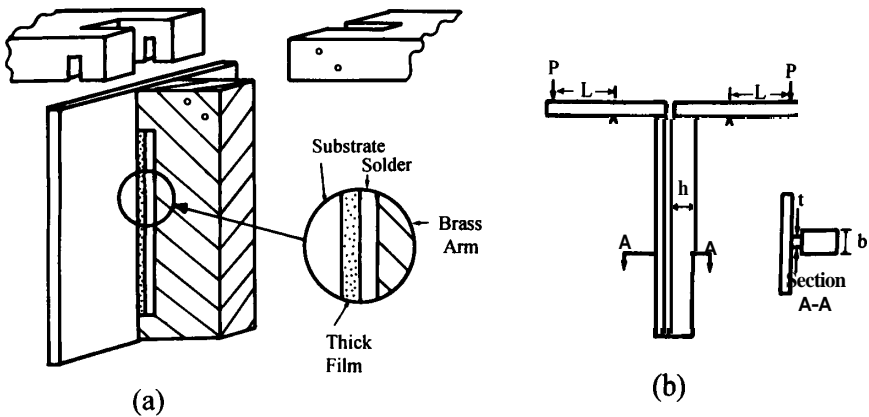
Applied moment DCB specimen for measuring the adhesion of thick films. (a) Specimen preparation; (b) testing arrangement [40].
